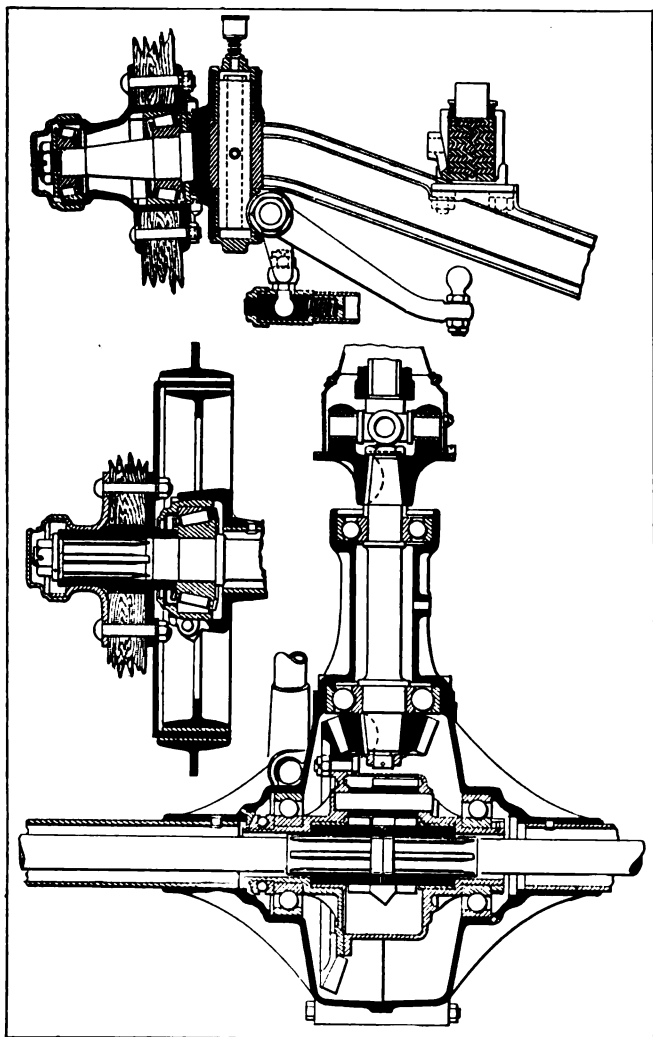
Front and rear axle of the Pierce-Arrow, showing the details of the general assembly of the differential and front knuckles
